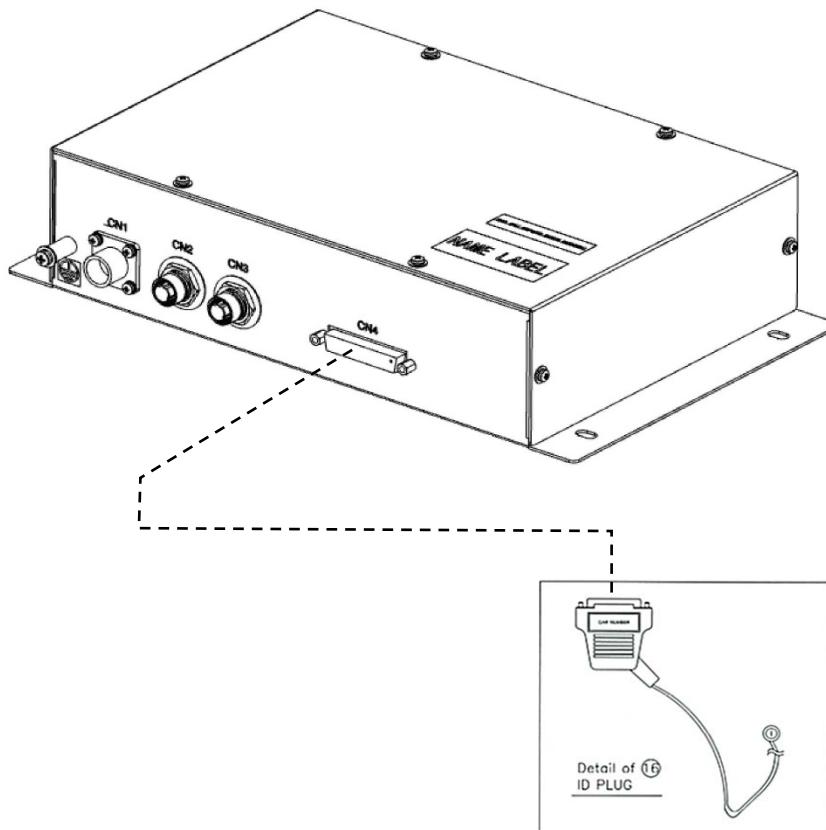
Detail View of IFU installed without SmartDrive system
